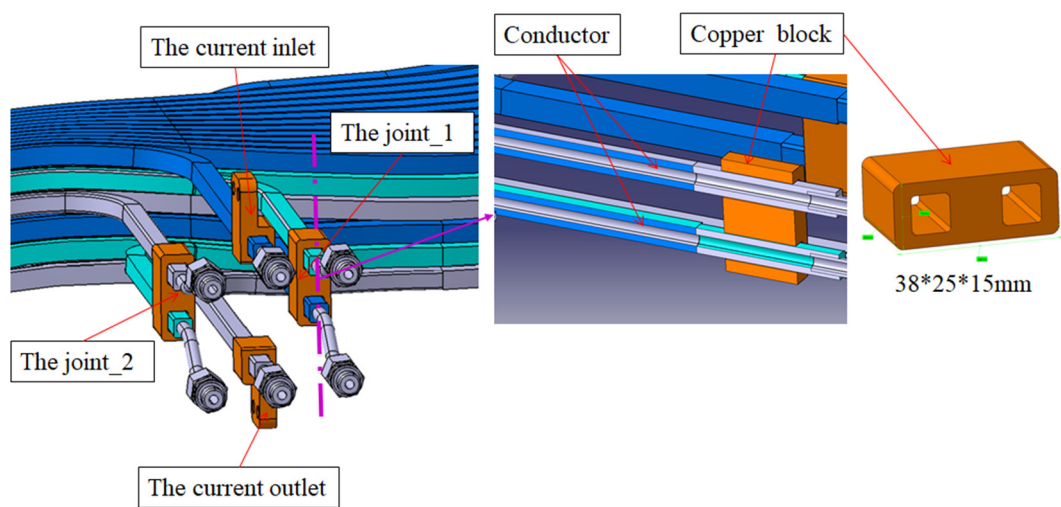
M4 mock up coil joint detail design
